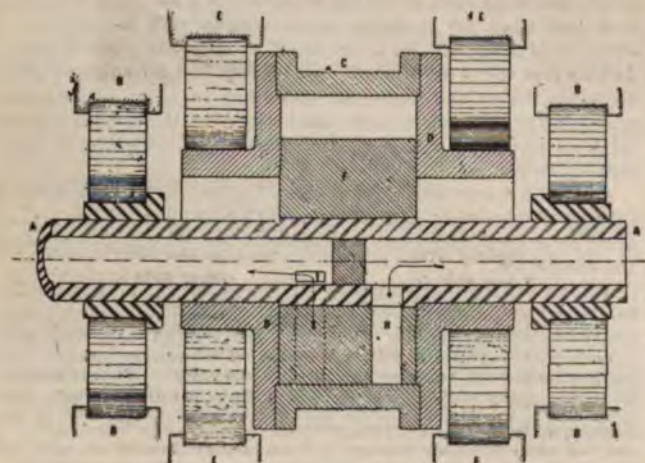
SECTION OF HULT ROTARY ENGINE.
